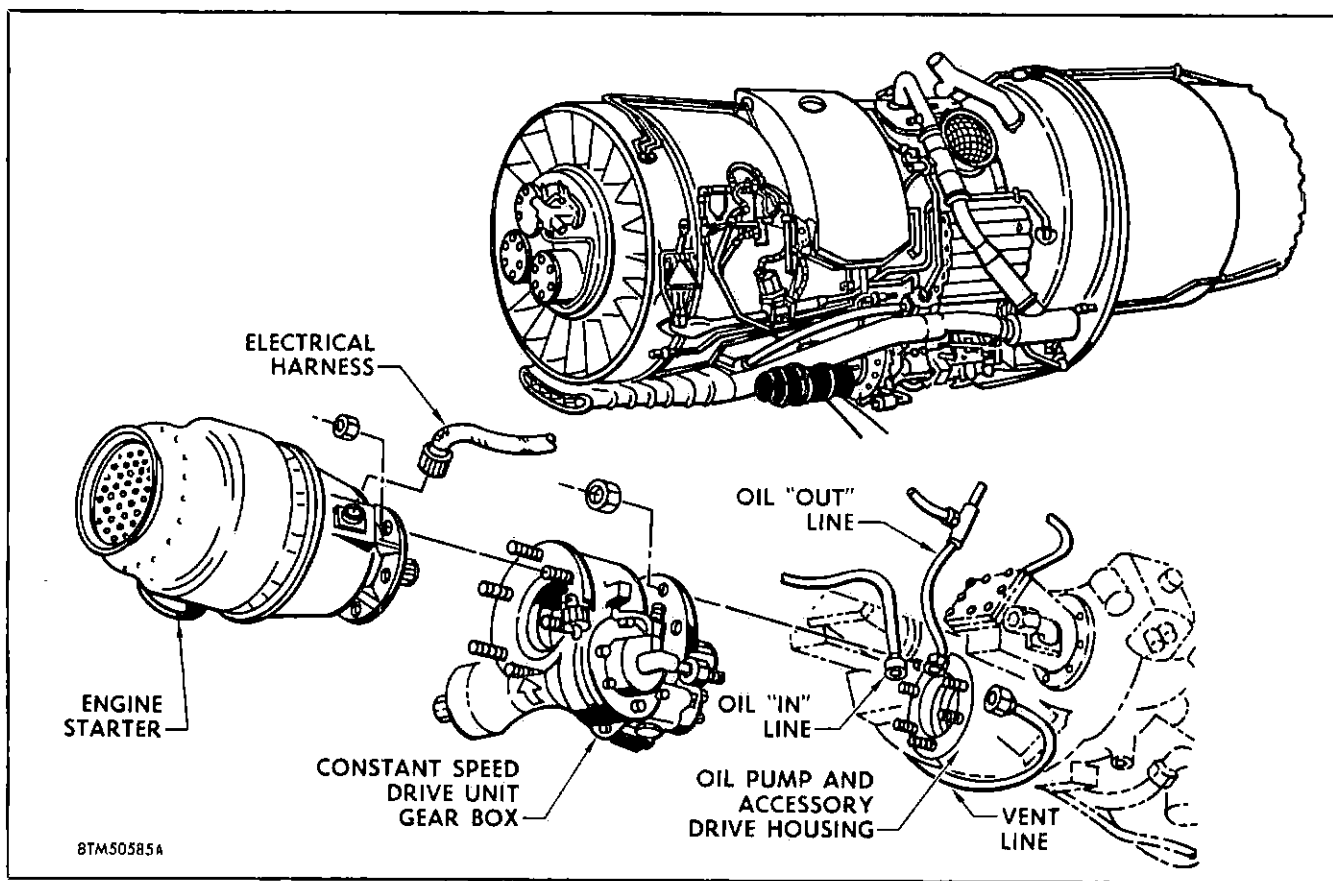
Sundstrand Gear Box and Engine Starter Installation
